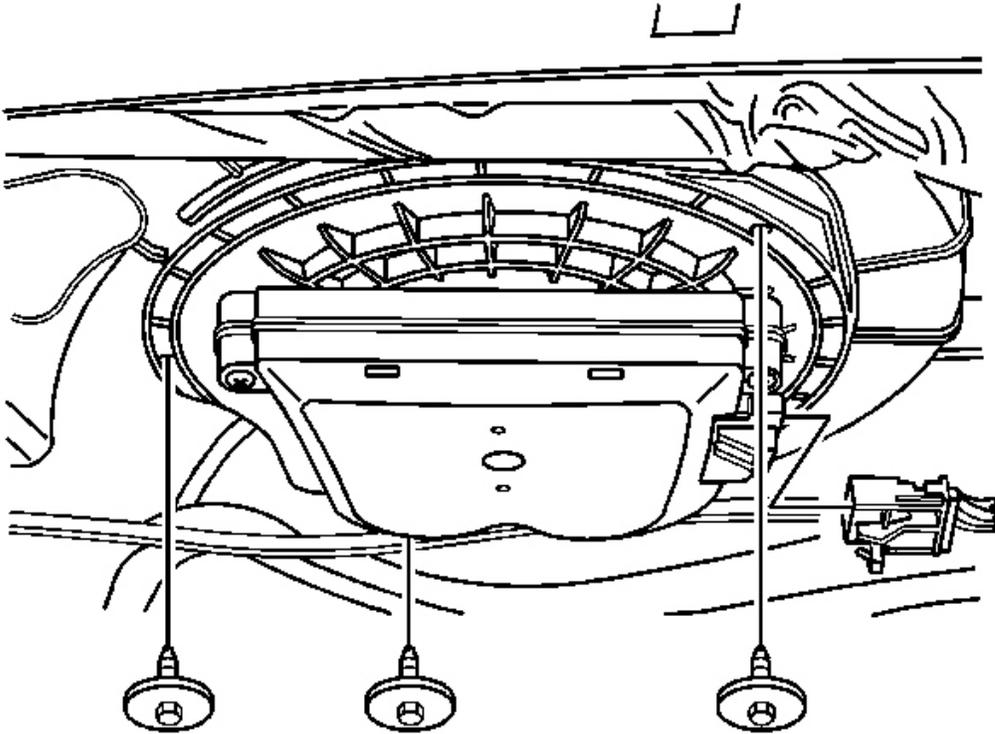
Blower Motor & Retaining Screws At HVAC Module
